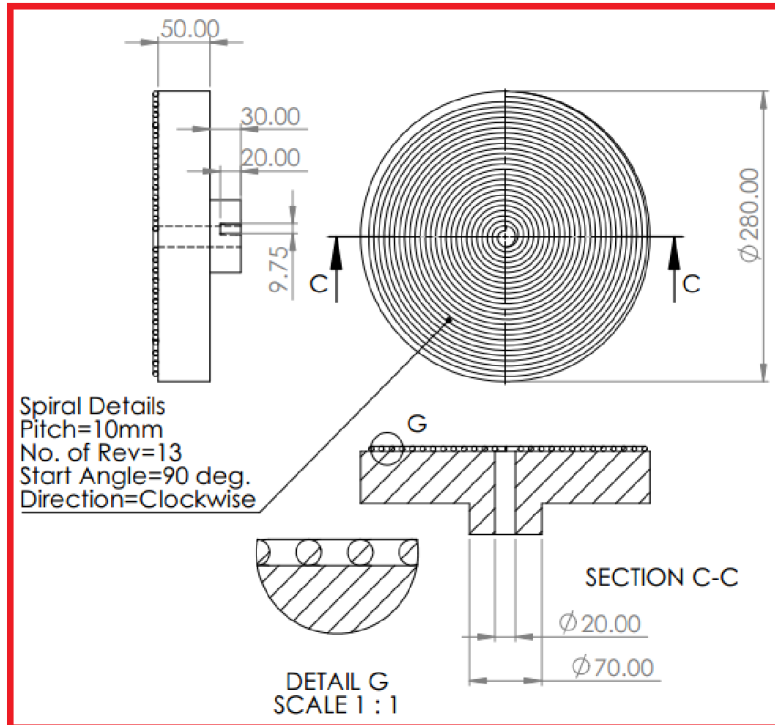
Wheel Holding Jaw Geometry and Dimensions (mm)
